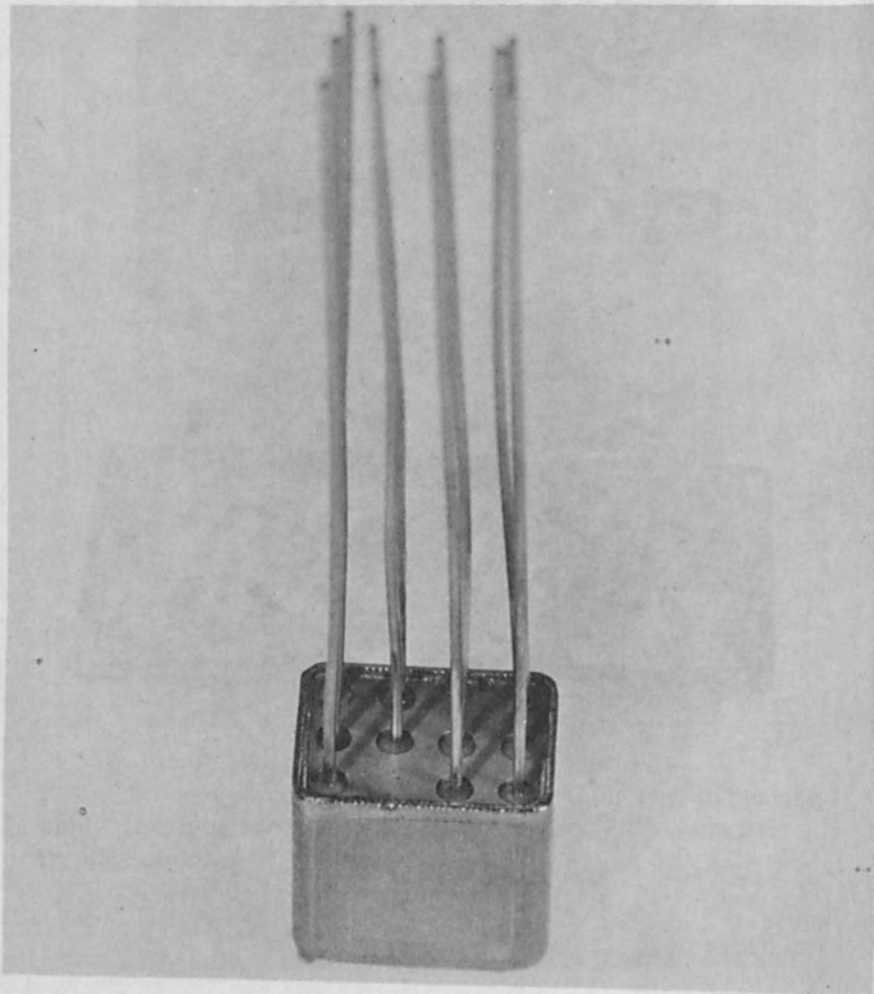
Is another relay case Laser welded but with the weld much closer to the insulator material than the assembly shown in Fig. 4.
